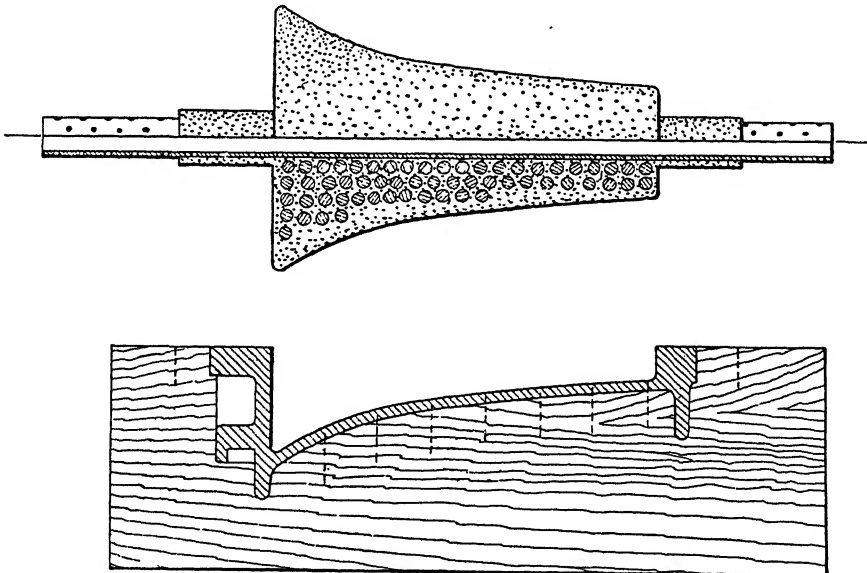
Core swept on Bar for Fusee Barrel, fig. 16. The section of the casting is drawn on the board for the information of the moulder
